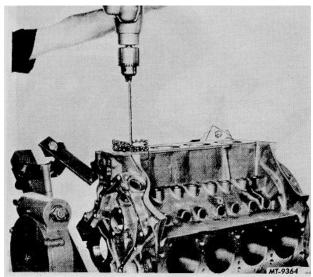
Deglazing Cylinder Wall Surface Using SE-2314-5 Glaze Breaker Brush and Electric Drill
